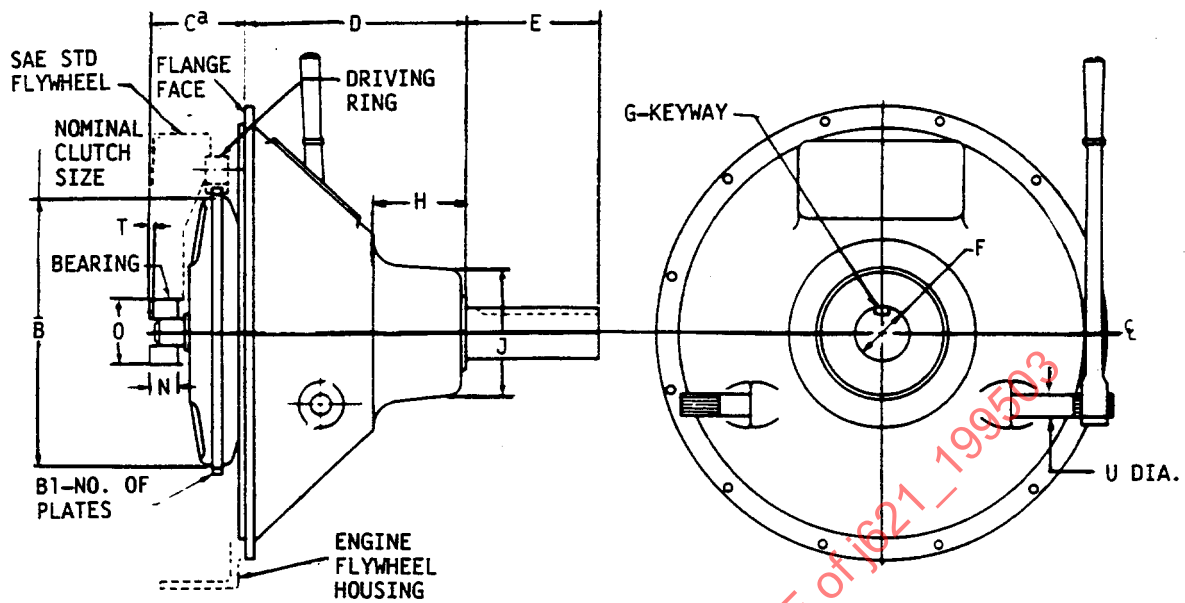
DIMENSIONS OF INDUSTRIAL POWER TAKE-OFFS WITH DRIVING RING-TYPE OVERCENTER CLUTCHES
